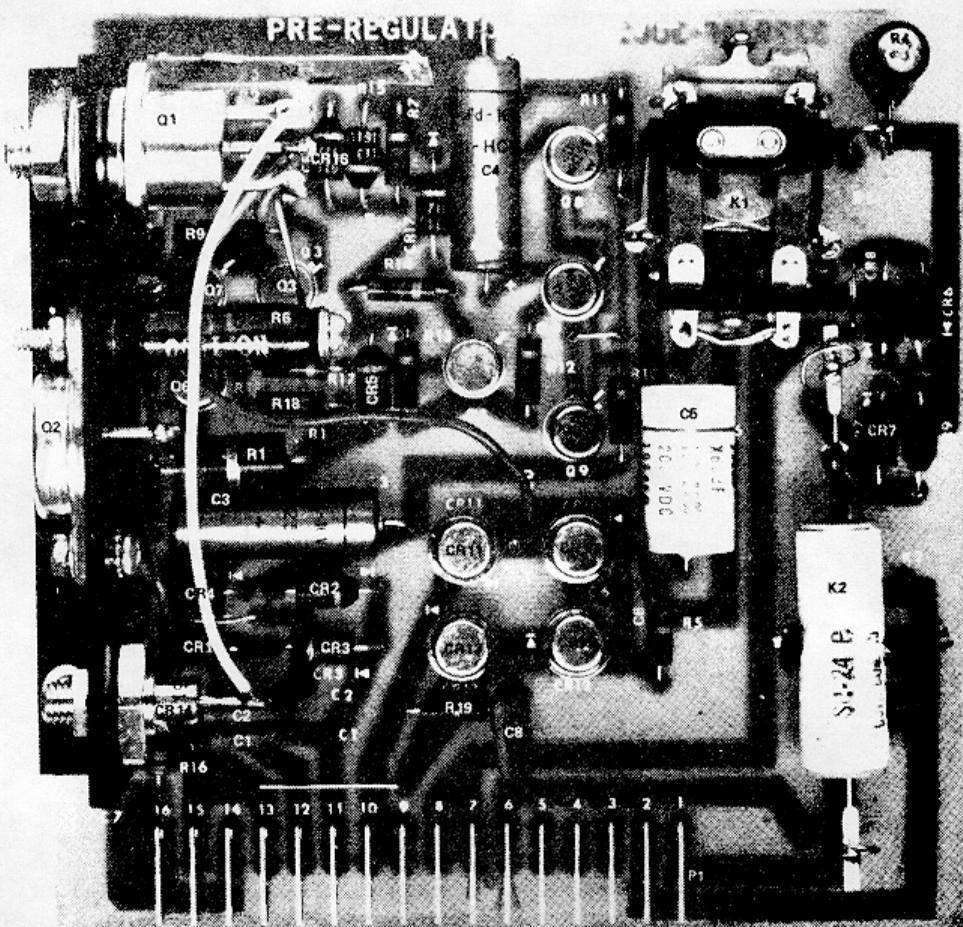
PREREGULATOR P/C ASSEMBLY
